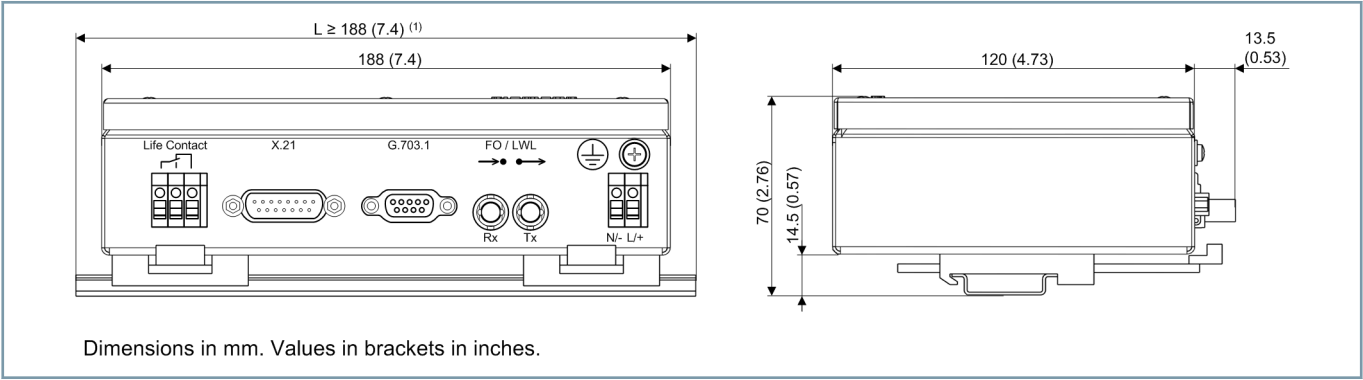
/4 Dimensions of the Communication Converter, Front and Side View
